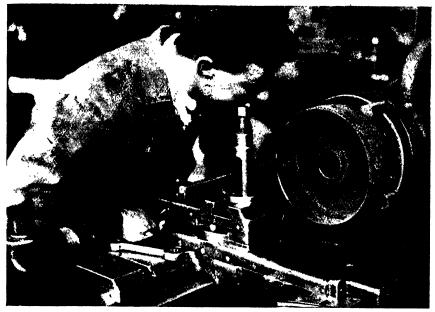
SKIMMING OUT SCORED BRAKE-DRUM
